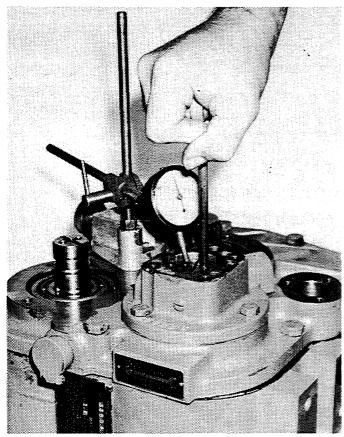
Applying Pushing Force While Checking Reverse Clutch Shaft End Play.
